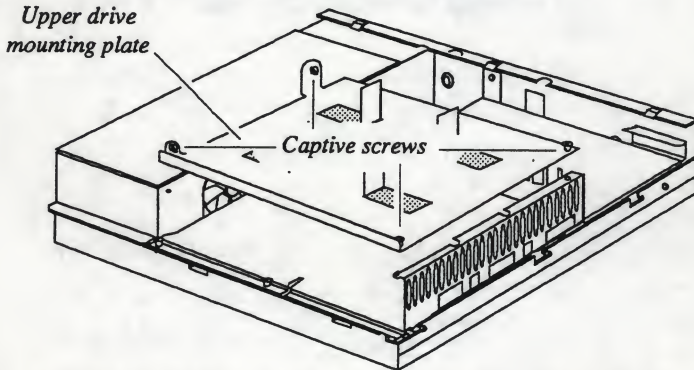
Removing the Upper Disk Drive Mounting Plate
